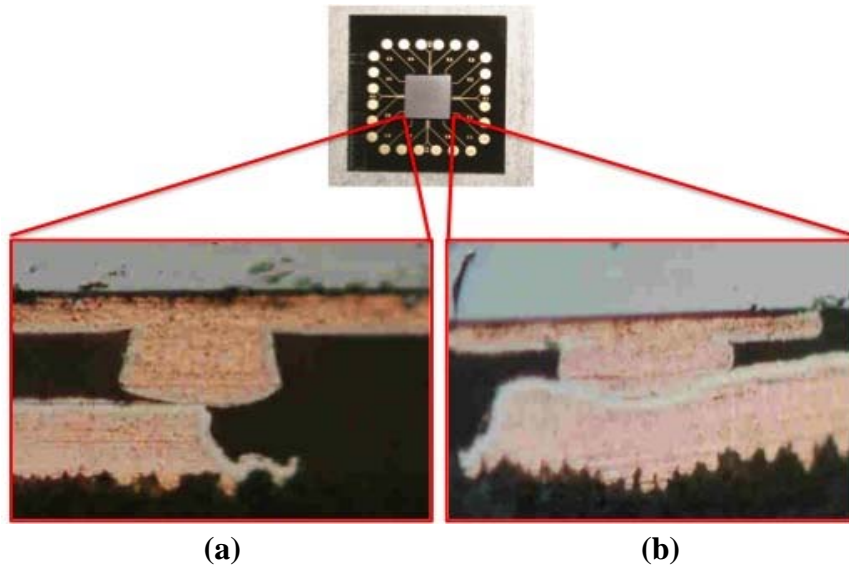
Cross-section of partially-yielding die showing (a) no deformation on the left edge and (b) proper bump-to-pad deformation on the right edge
